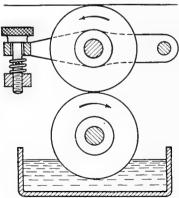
A type of gumming mechanism that is much in use in sheet-mounting machines and gumming machines. This type is easily cleaned and adjusted. When the rollers are long, consideration should be given to the deflection in the center of the rollers due to the pressure exerted in squeezing out glue. This deflection will result in a thicker film of glue in the center of the rollers than at the ends. This is usually compensated for by making the glue roller larger in diameter in the center than at the ends. The device has no trimmer blade, but thickness of glue film is regulated by adjusting the gap between the rollers.
